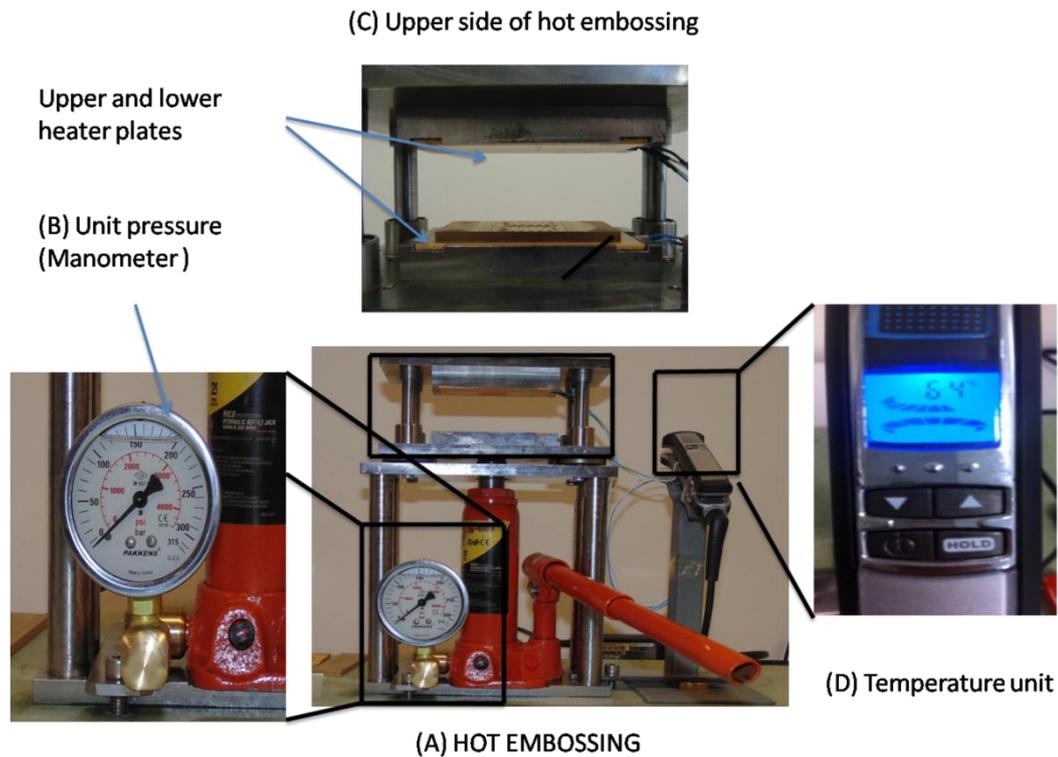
Constructed Hot Embossing Press. (a) Overall view of the press (b) Manometer for monitoring the embossing pressure (c) Heater plates (d) Temperature controller unit.
